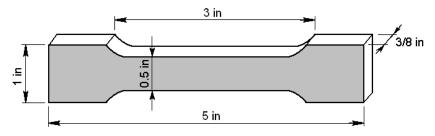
Tensile-testing specimen shaped part to be cast in aluminum.
